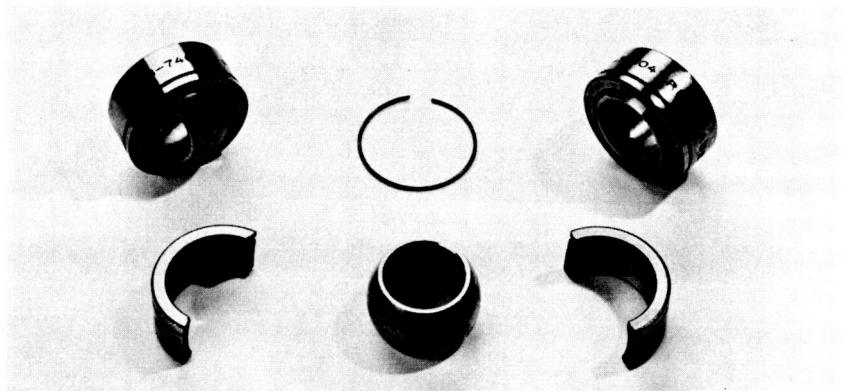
Spherical bearing for solid lubrication, $\frac{5}{8}$ -in. bore.
